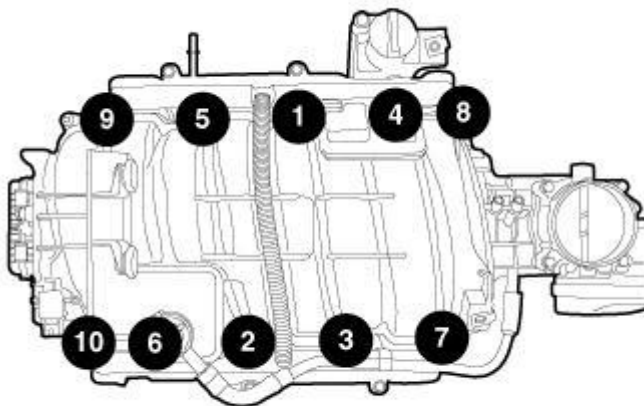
Intake Manifold Retaining Bolt Removal & Tightening Sequence
